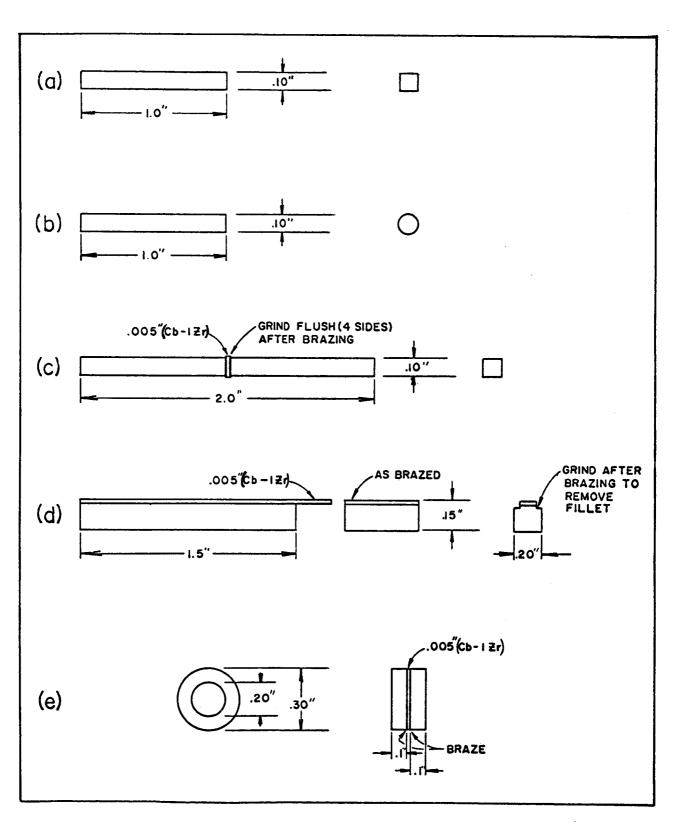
Test Assembly Geometries WAED64. 14E-123
